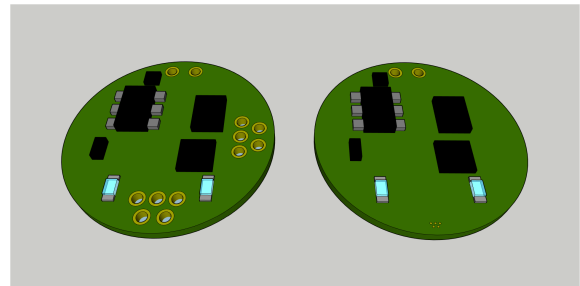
(Left) Current custom programming ports (Right) future denser programmer footprint, identical on top and bottom of PCB.
